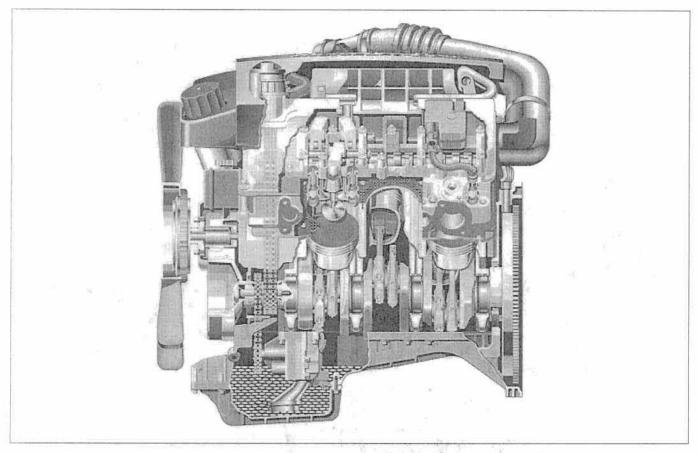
3.2-Liter V-6 Engine (Longitudinal Cross Section)
